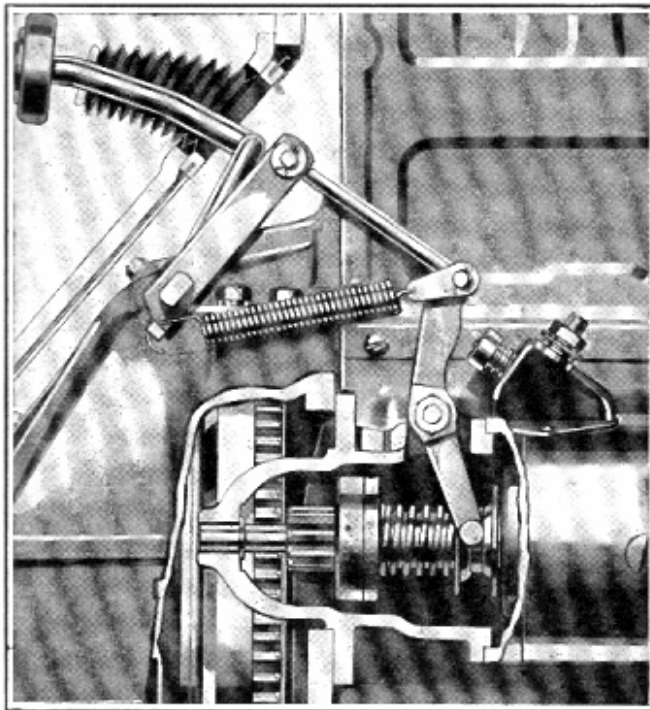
Starting Motor Control and Cut-Away of Starting Motor Drive
